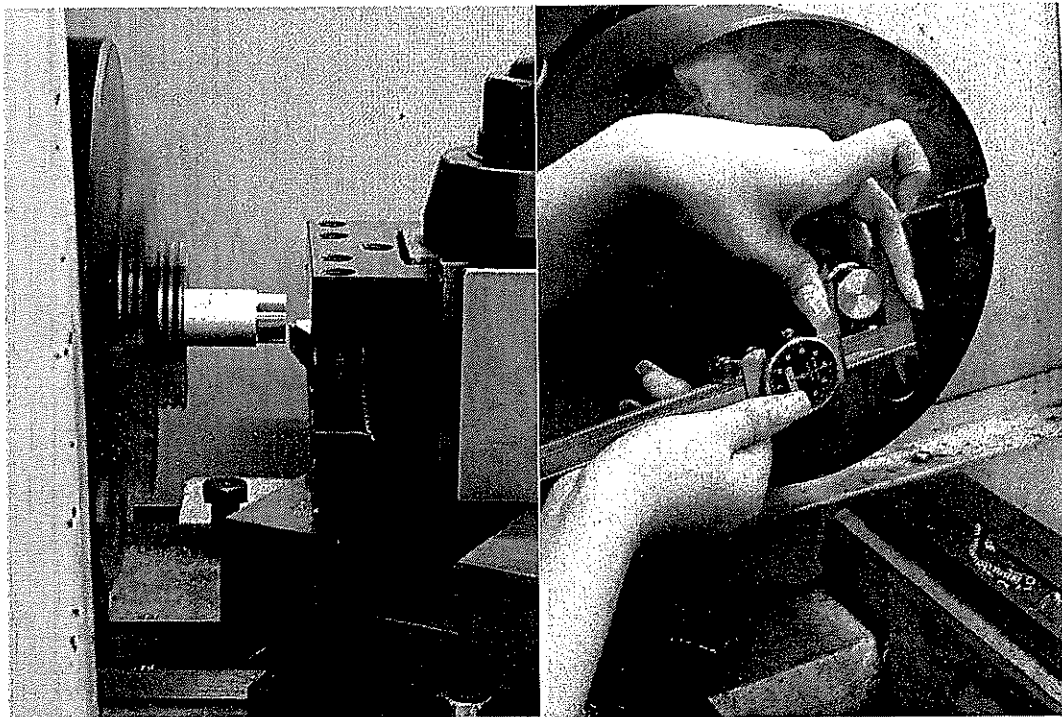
The diameter of one side of the shaft is being machined in the Summit Lathe.
